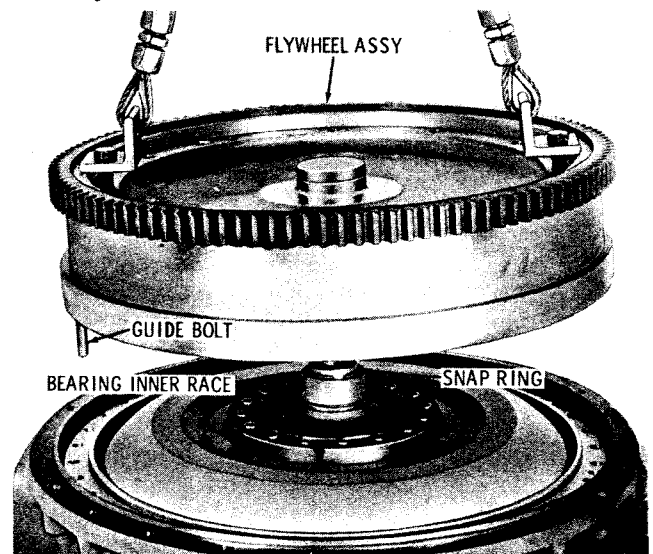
Installing flywheel assembly (direct-mount models)
